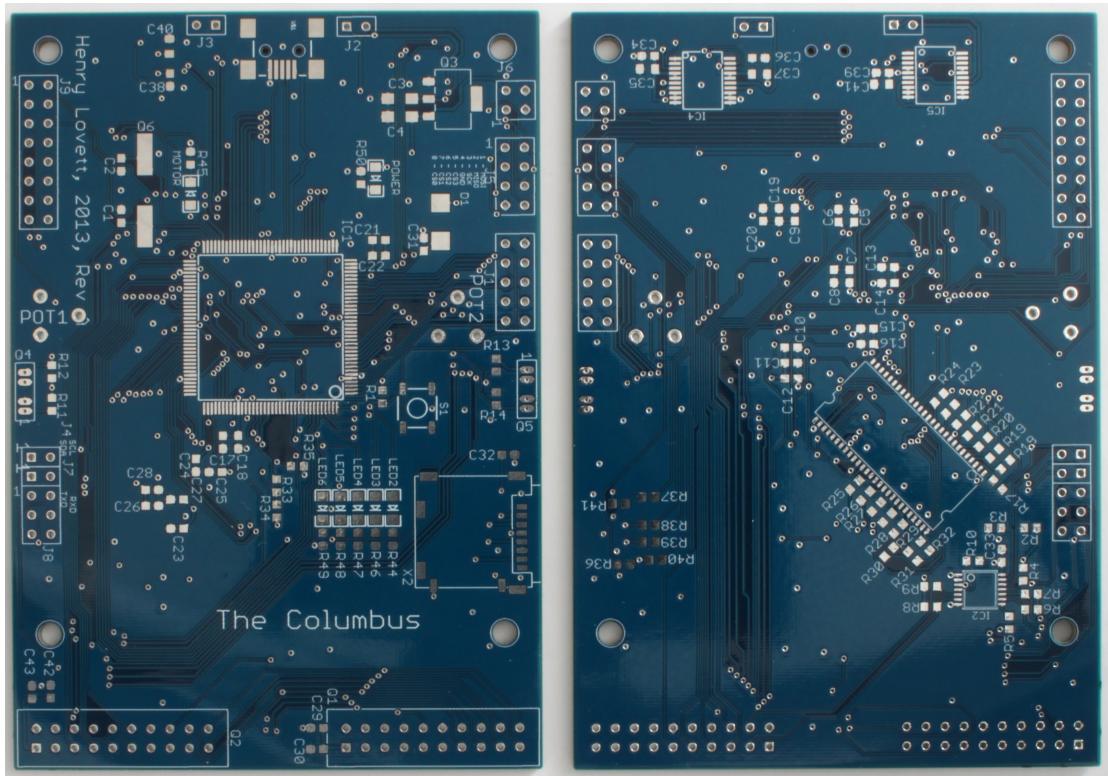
PCB with no components. Left: Top View. Right: Bottom View
